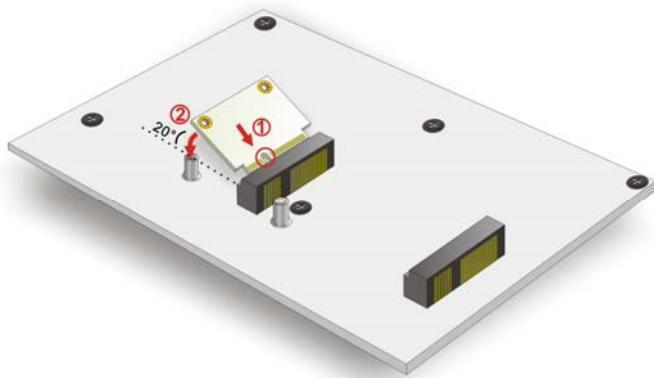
Insert the Half-size PCIe Mini Card into the Socket at an Angle
